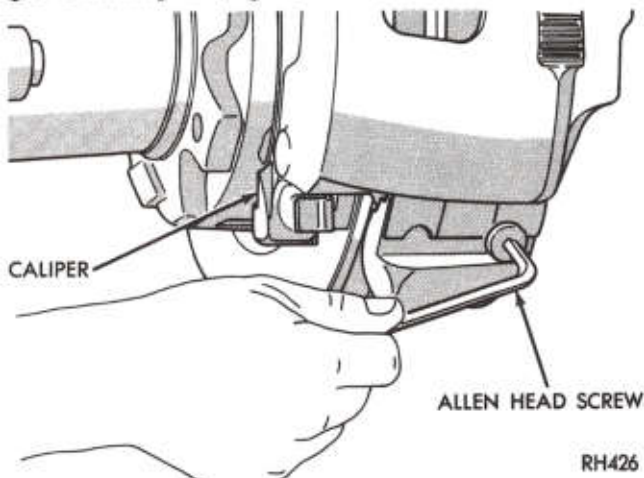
Removing or Installing (Allen Head) Key Retaining Screw
